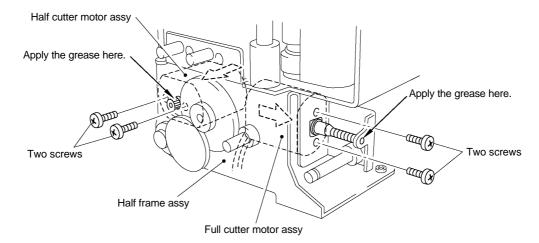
Reassembly of the Half Cutter Motor Assy and the Full Cutter Motor Assy
